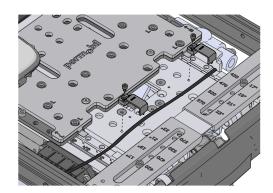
The ICS bus cable is laid across the seat frame and mounted in the two cable brackets.
